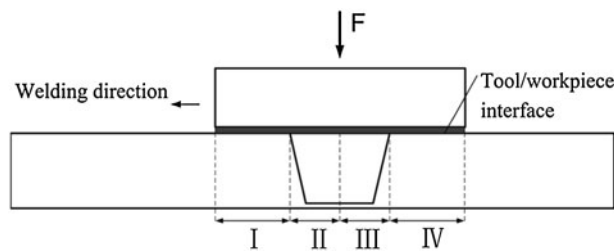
Schematic diagram for weld formation during FSW.
